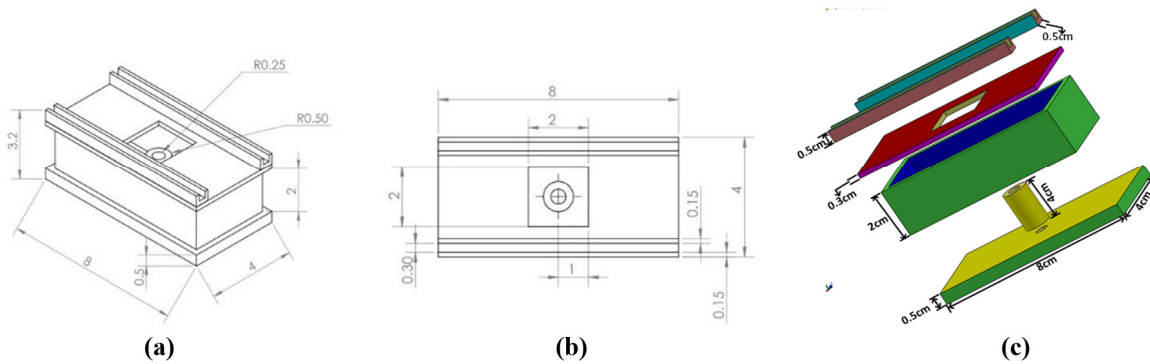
Detail dimension of the sample chamber which houses the detector circuitry. (a) isometric View (b) top view (c) 3-dimensional exploded view (all dimensions are in cm).
